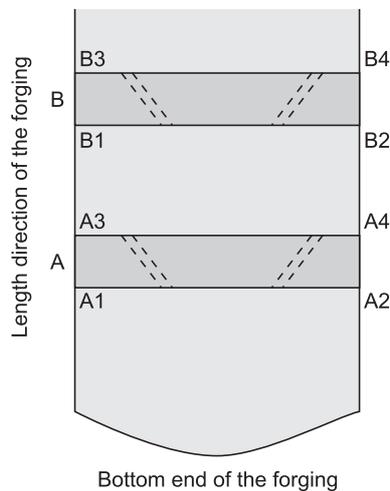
SCHEMATIC OF FRECKLE-LIKE DEFECTS IN ESR QUALITY FORGINGS
